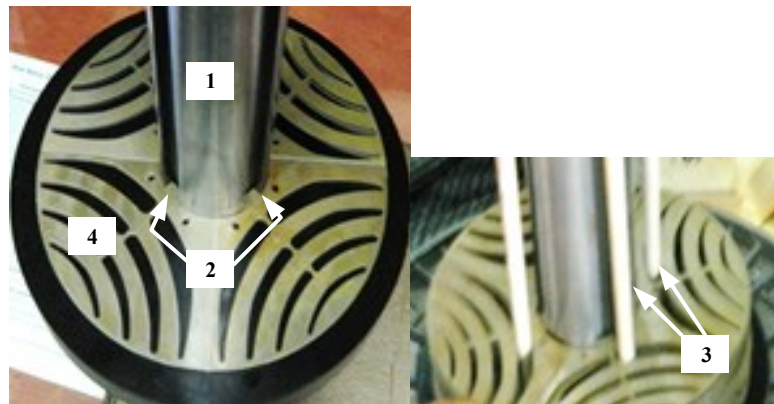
CRGO rotor assembly. (1) Rotor shaft. (2) Keyways. (3) PEE studs. (4) Single pole lamination.
